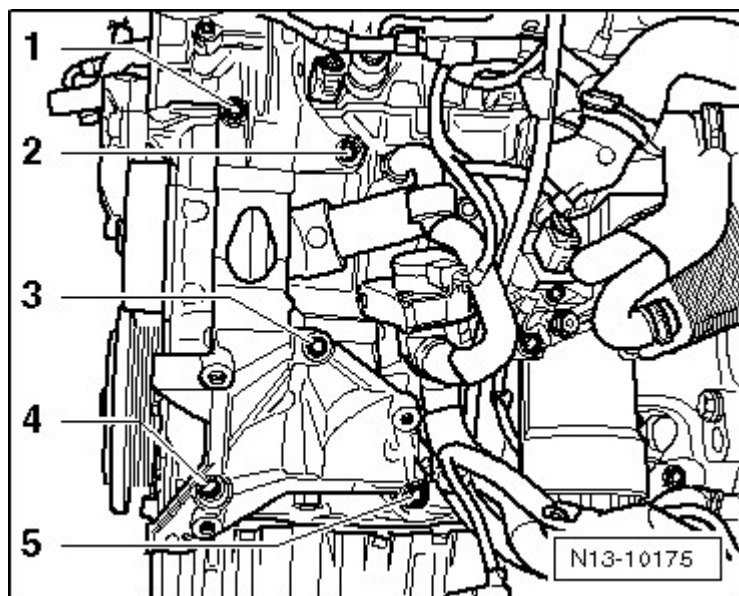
Identifying Bracket On Cylinder Block, Removal/Installation
